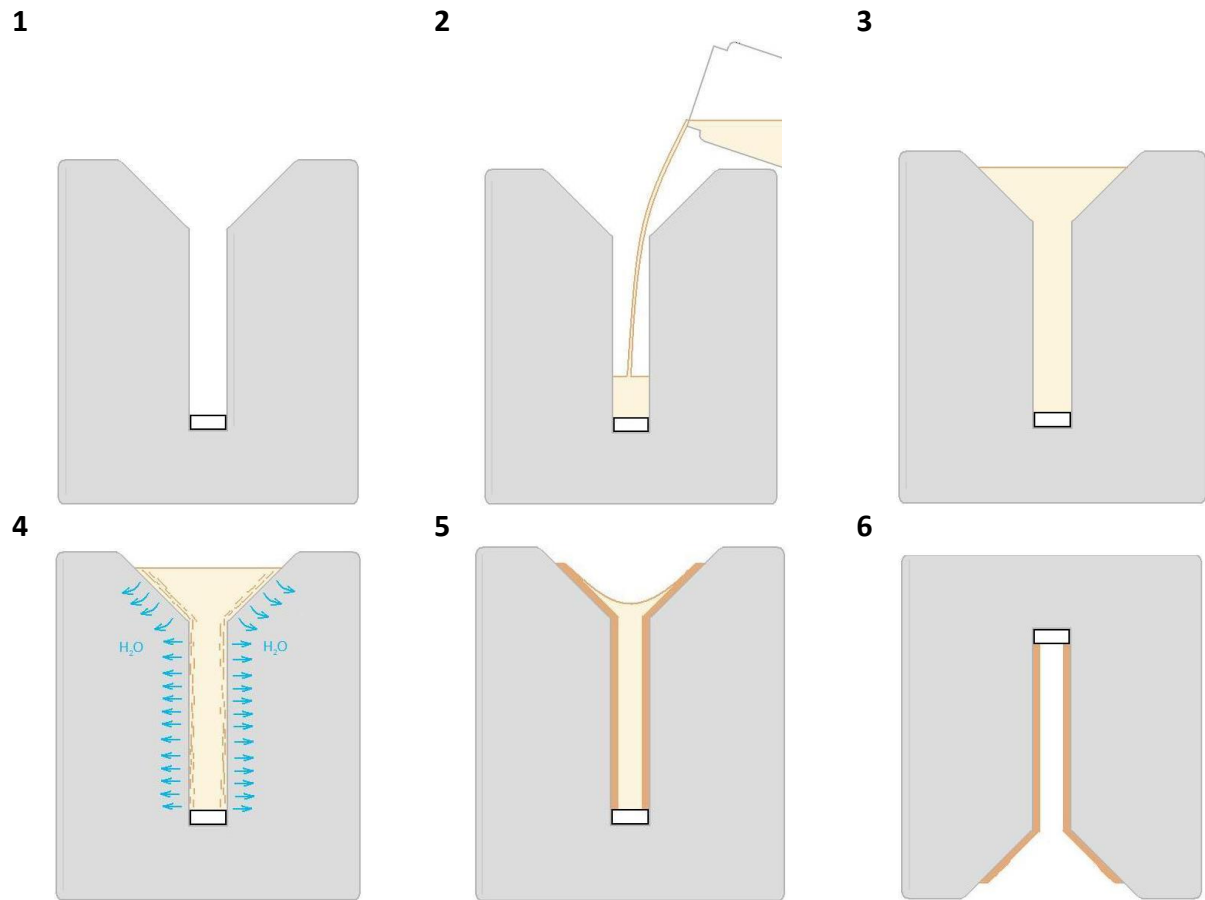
Slip casting process in detail, 1. Mould equipped with Teflon disk, 2. Filling the mould with the slurry, 3. Formation of the shards, 4. Removal of the excess slurry, 5. Drying and shrinkage of the sample, 6. Demoulding
